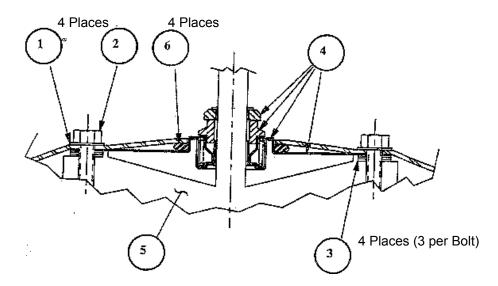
Disc Motor and Lower Chamber Mounting Detail
